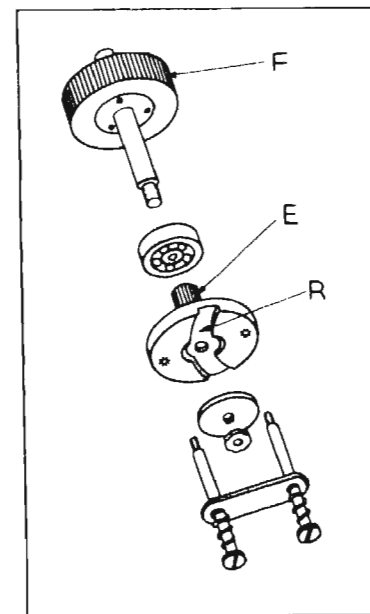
Exploded view shows the friction coupling between gears *E* and *F*.
